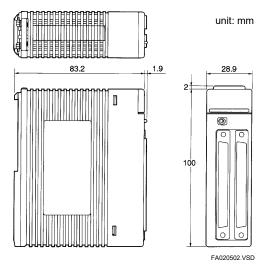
I/O Module External Dimensions (F3XD64-3N)
